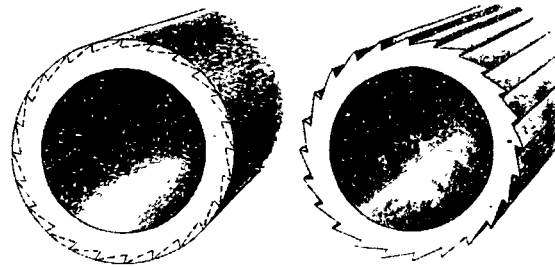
Sections machined from bar stock or pipe can often be replaced by aluminum sections extruded to exact shape and size.
